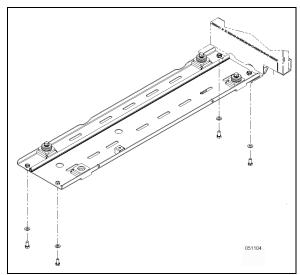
LOWER SUPPORT MOUNTING BOLTS
